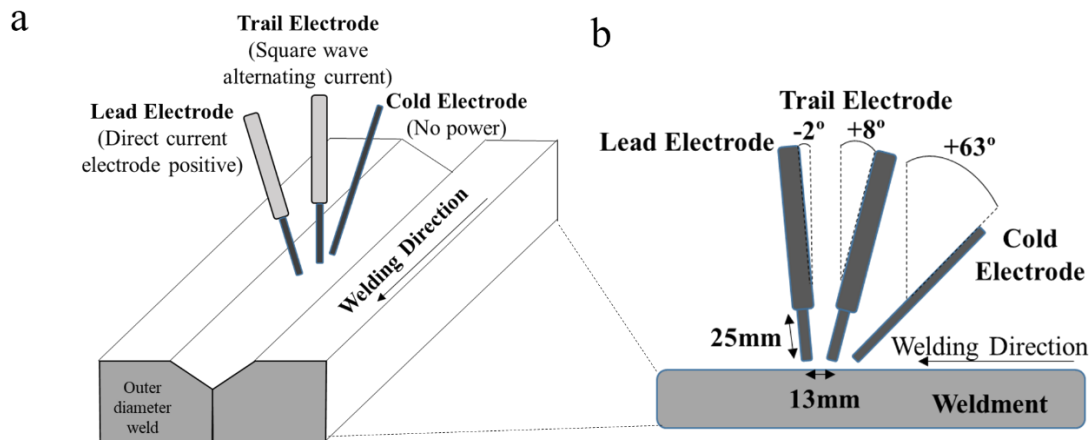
Setup for CWTSAW process: a) Overview of welding set up, b) schematic view of fixed welding variables.
